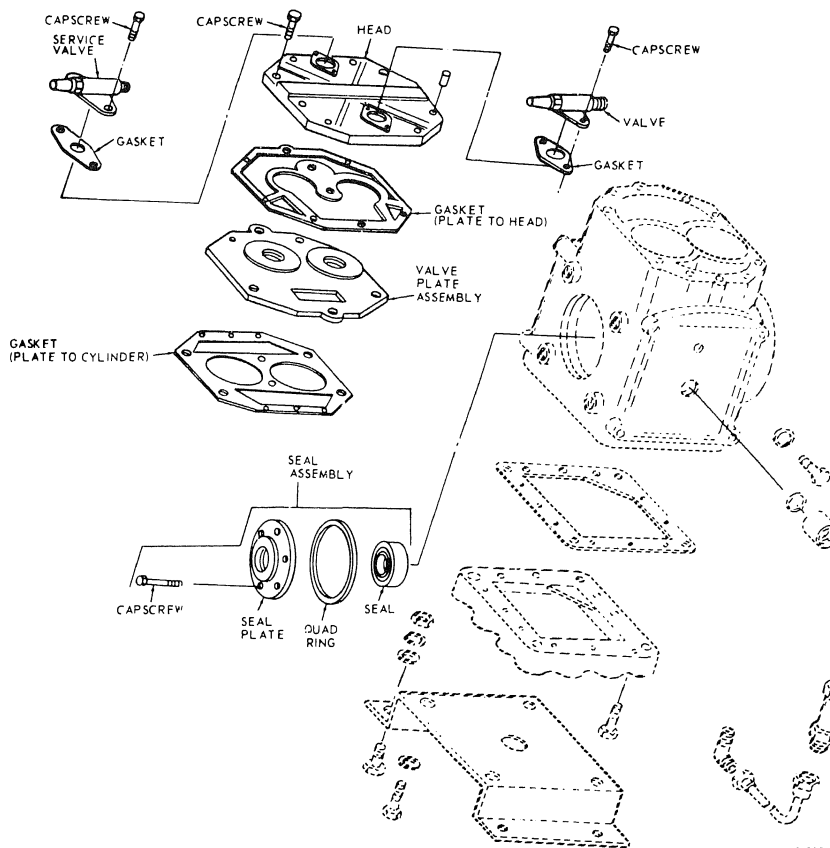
Compressor, Keco-York and MECOM Models, partial exploded view.
